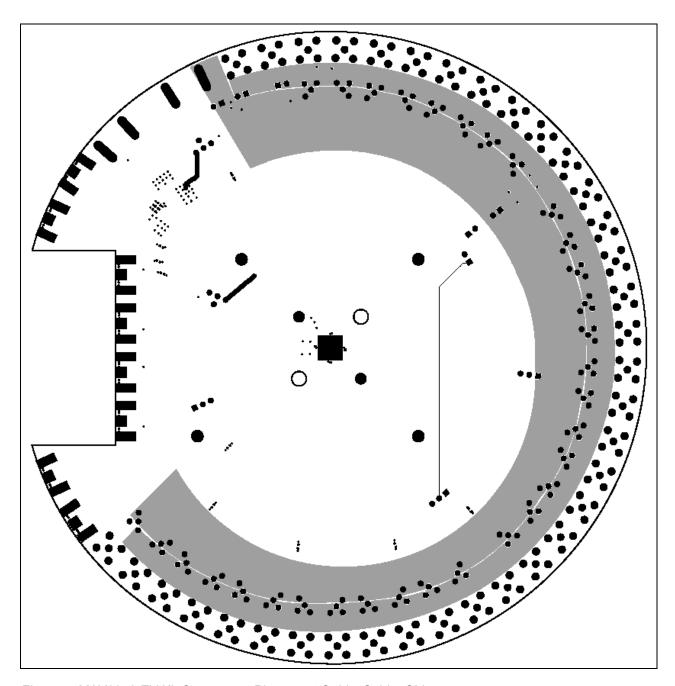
MAX3952 EV Kit Component Placement Guide-Solder Side
